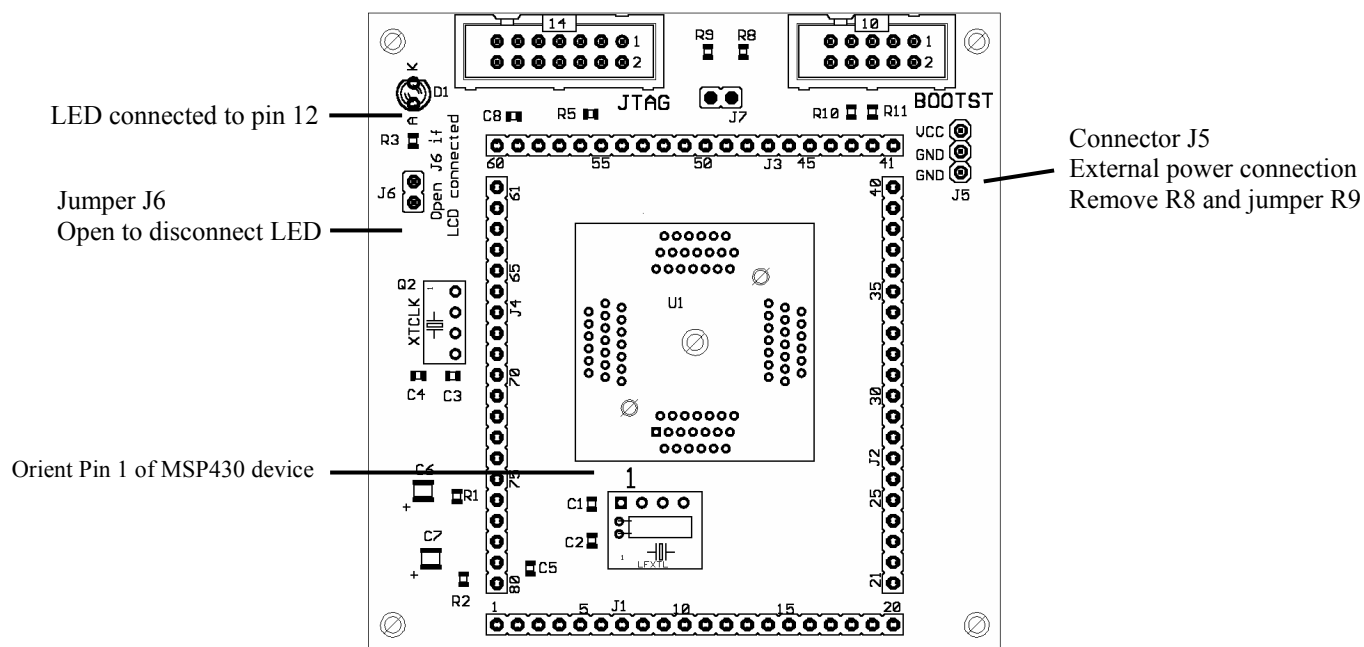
MSP-TS430PN80 Target Socket module, PCB Pictorials
